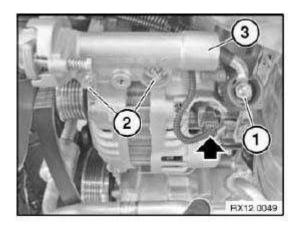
Identifying Tensioning Device Courtesy of BMW OF NORTH AMERICA, INC.
